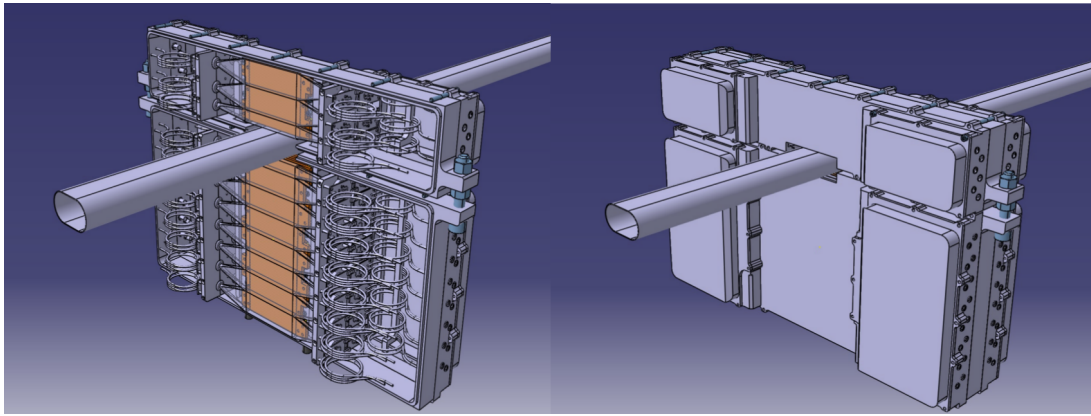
CAD drawing of the Station 1 and 2 assembly, left pane shows internals while right pane the closed and assembled module. [13]
